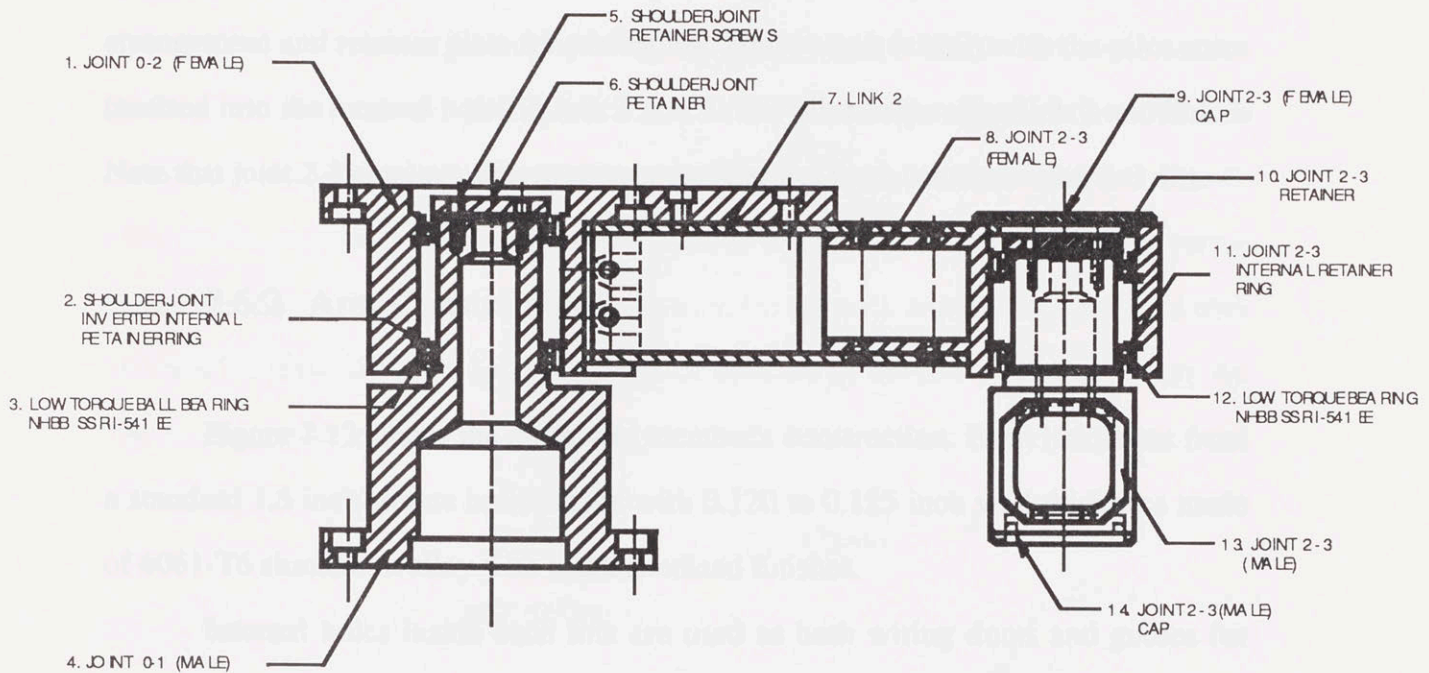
Cross Section of Shoulder Joint (scale 1:2.2)
